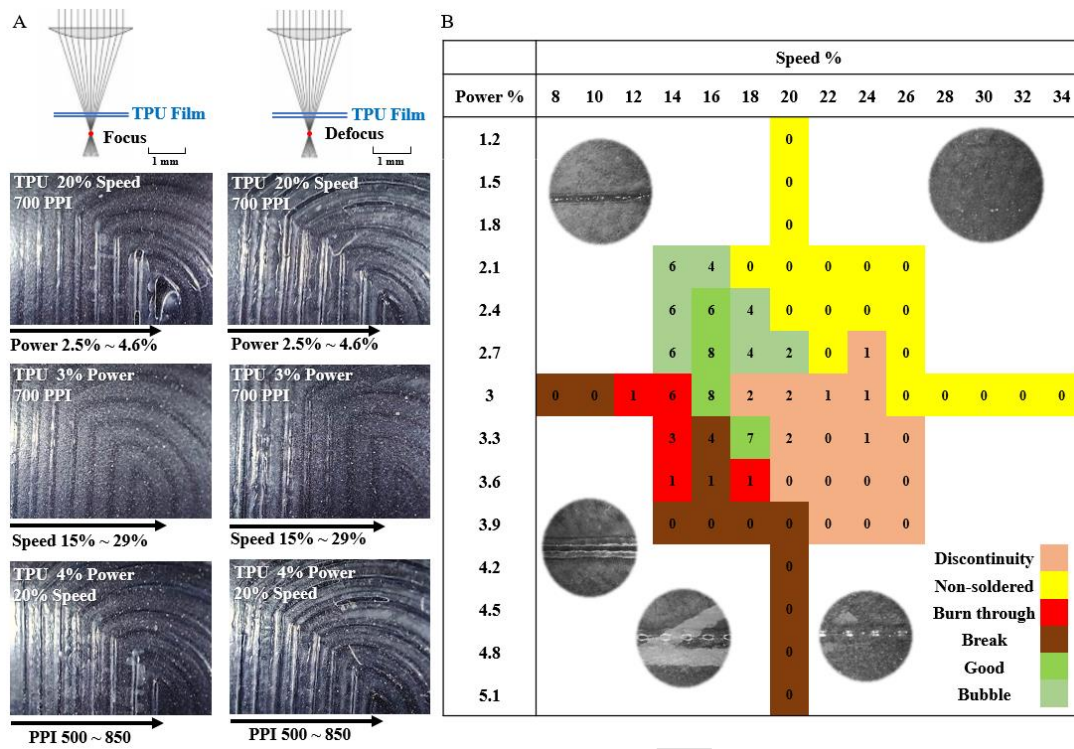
Welding results due to different processing parameters. (A) Welding traces through different laser speeds, power, and PPI. (B) Defect distribution and evaluation of welding results.
